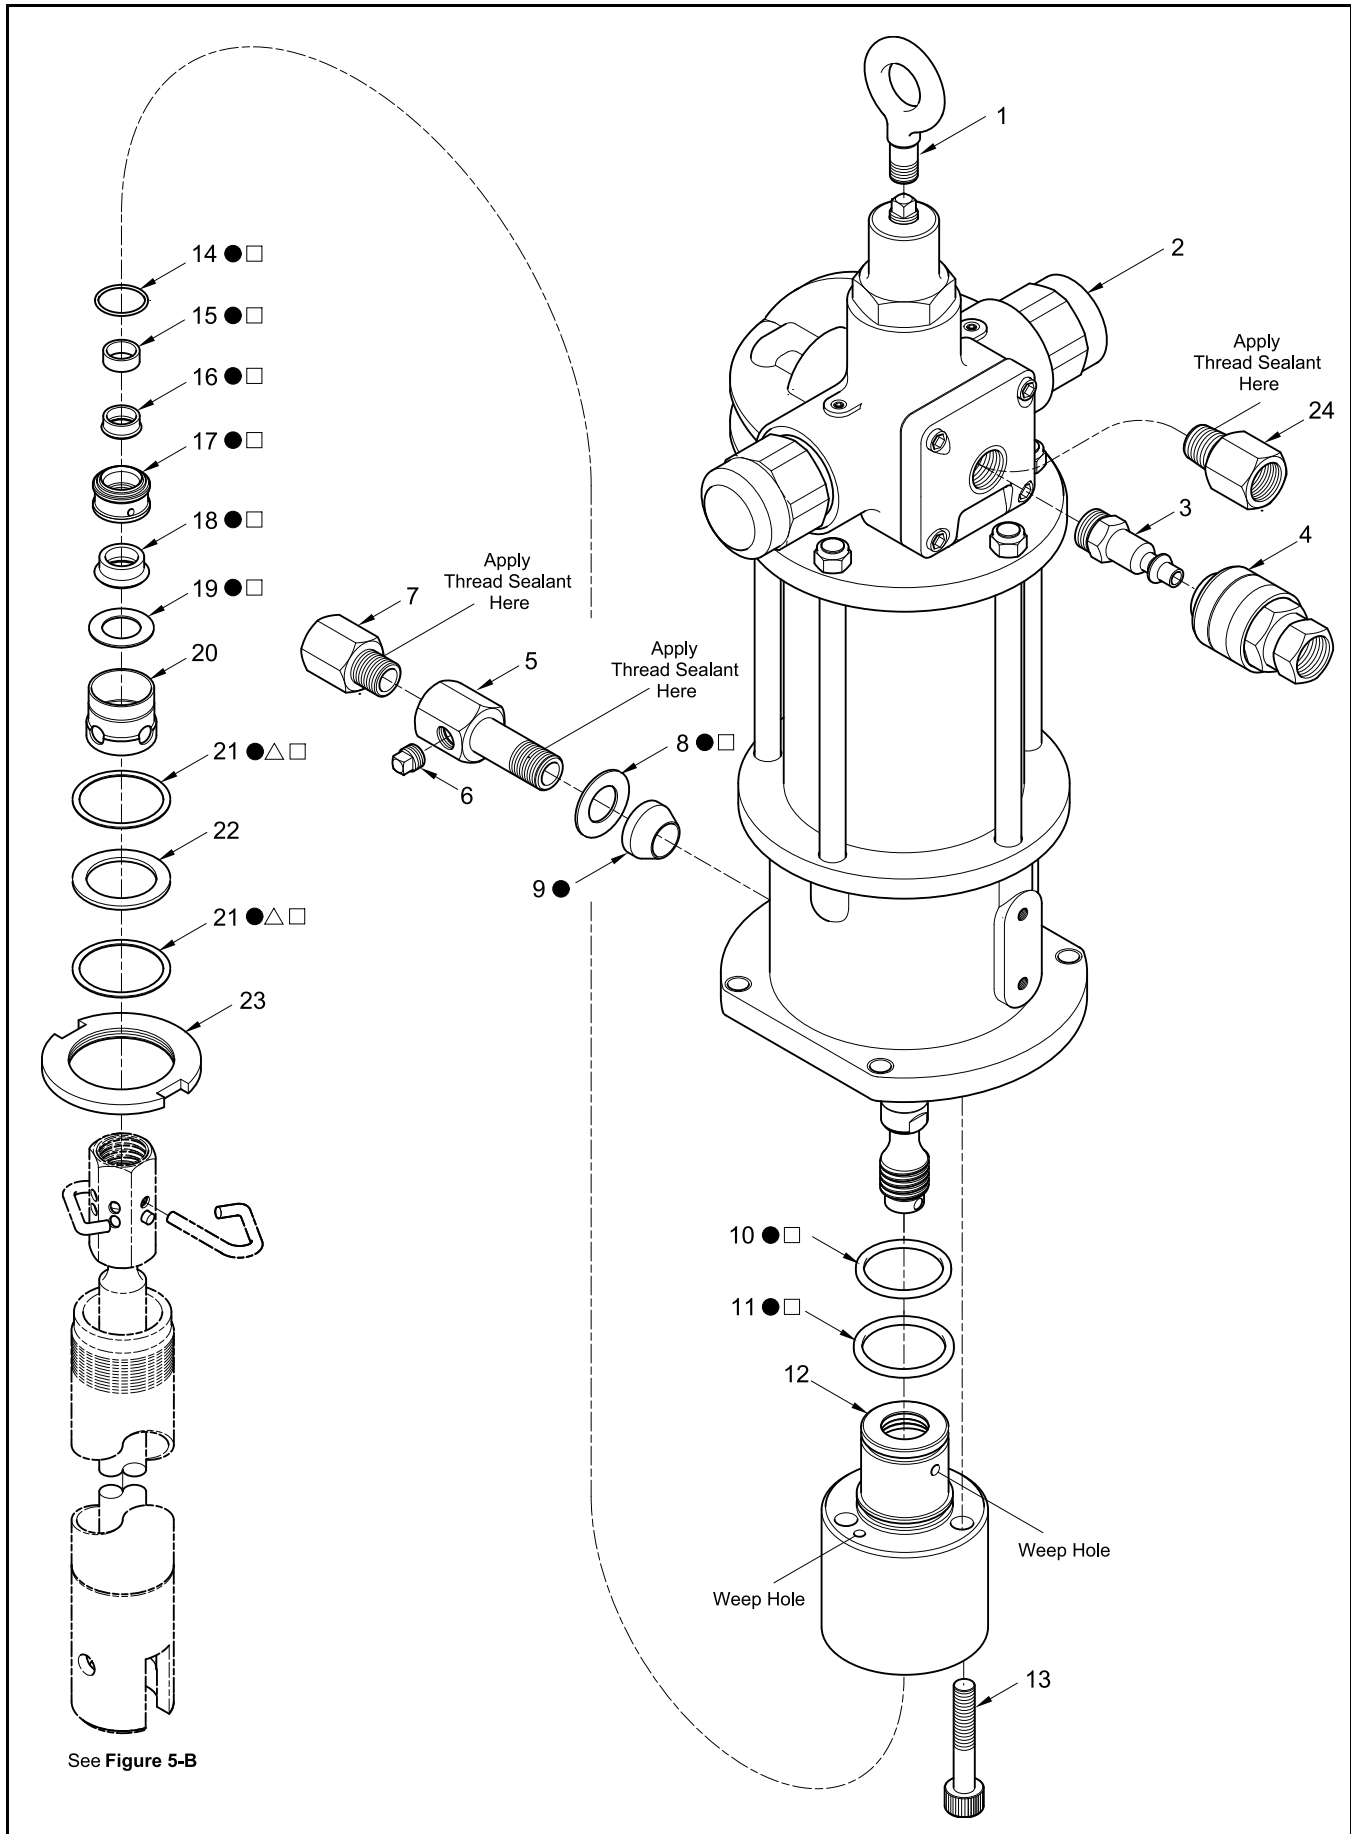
A High-Pressure Grease Pump Model 7786 Series - Exploded View
